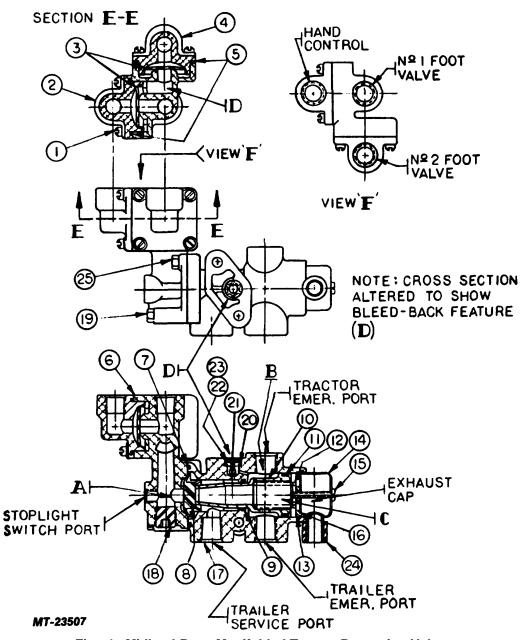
Midland-Ross Manifolded Tractor Protection Valve
